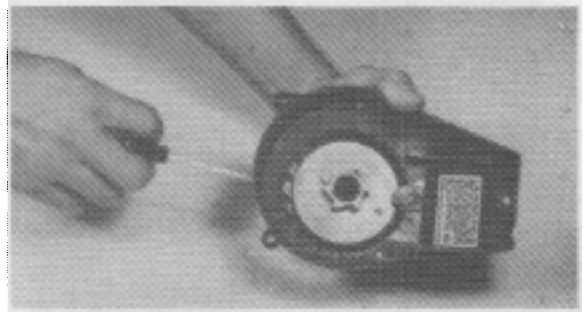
Checking pull cord for proper spring pressure. If spring pressure is weak and an adjustment will not work (Fig. 29), it will be necessary to replace spring.
